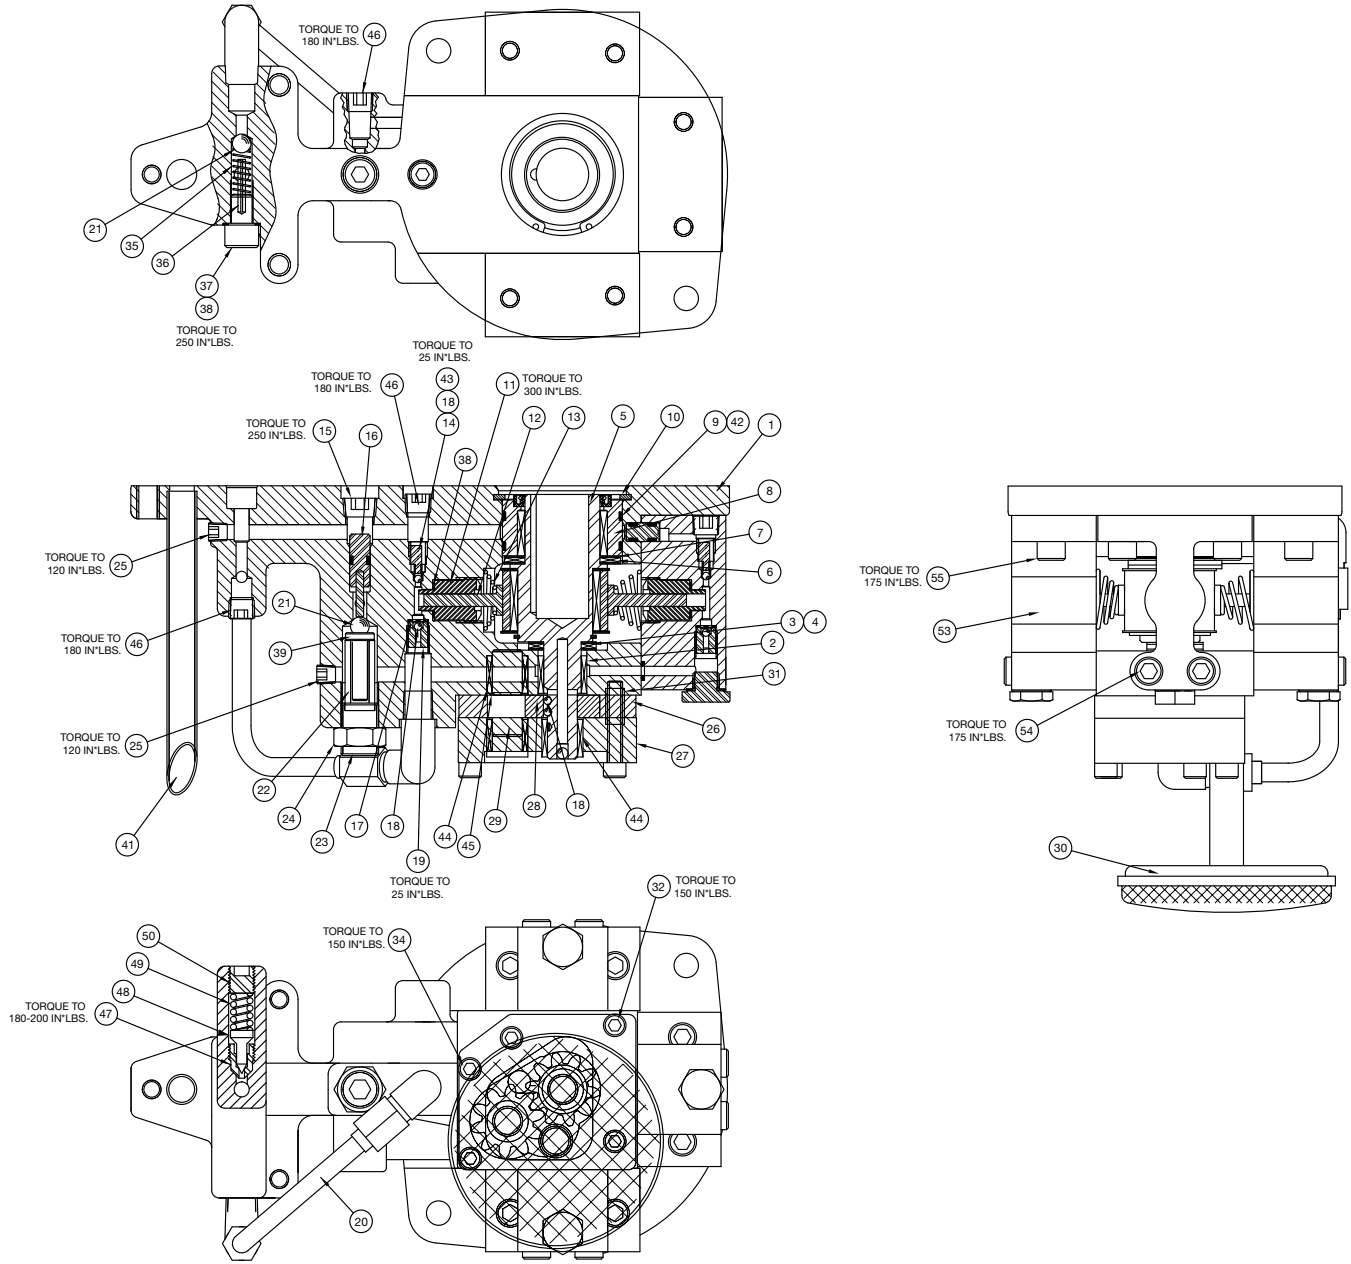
69769SS Pump and Motor Sub-Assembly
